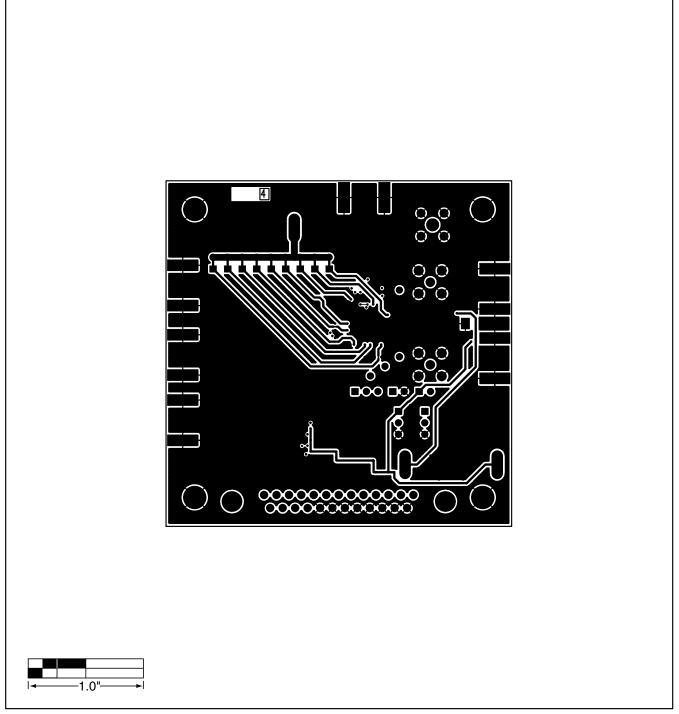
MAX2160 EV Kit PC Board Layout—Secondary Component Side
